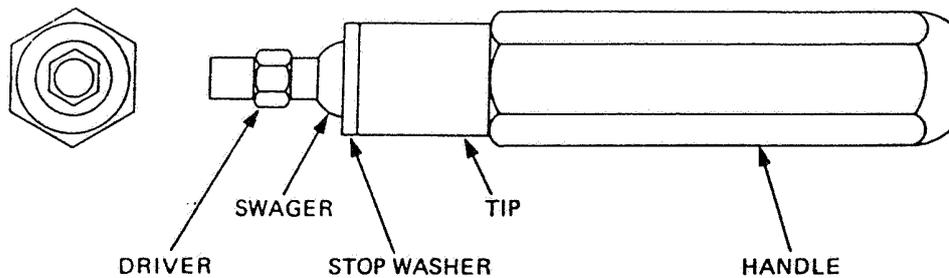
TYPICAL INSERTION TOOL (SWAGED INSERTS)
